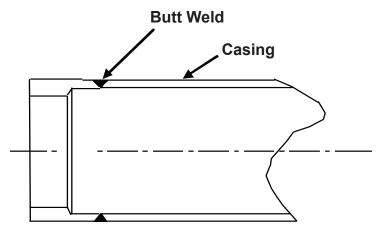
Shoulder Type Drive Shoe, External Butt Weld
